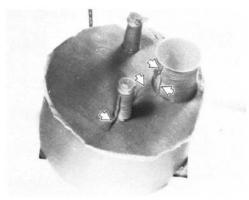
Magnetic Rubber Indications of Surface Cracks in Aircraft Fastener Holes (Produced by Yoke Magnetization DC Continuous)
